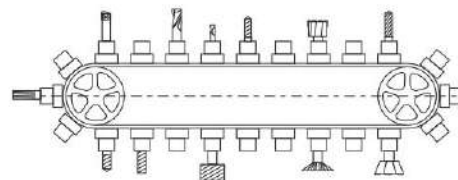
Chain-type tool magazine for holding larger number of spindle tooling used in CNC machining centres
